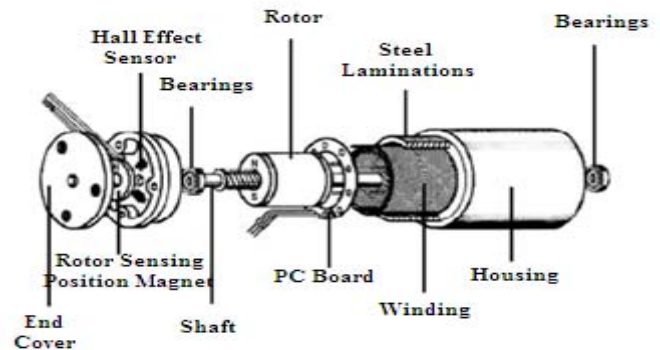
Cross sectional view of BLDC motor with hall sensors
